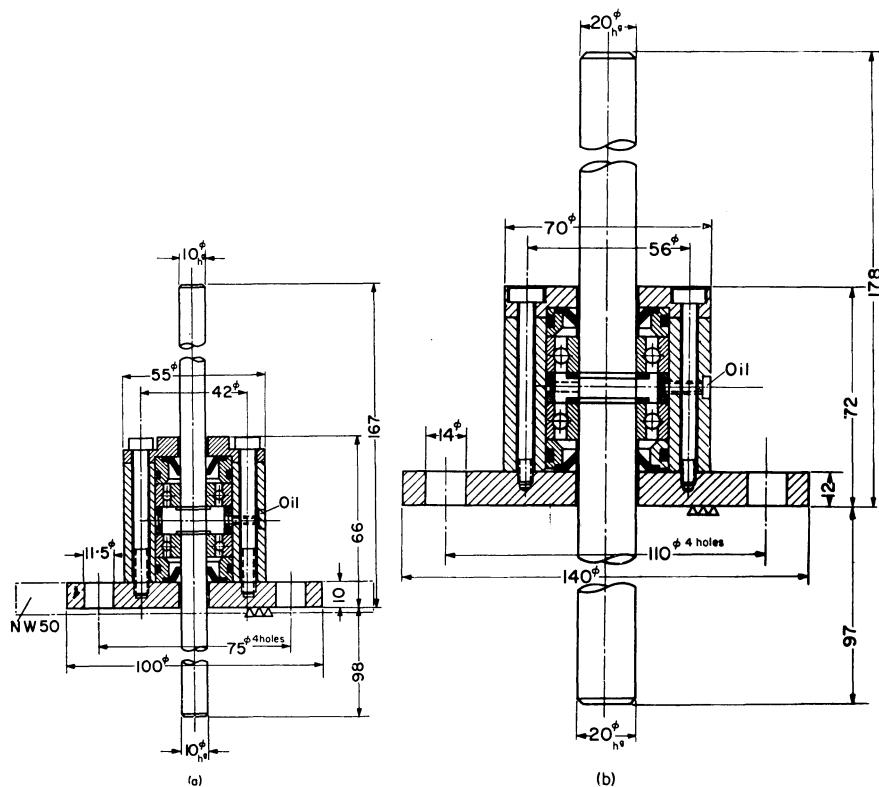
Dimensions of shaft seals supplied by Heraeus⁵⁴² (Table 5.9)
